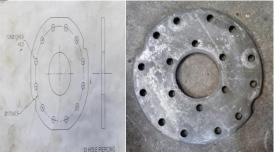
Hole Piercing Design& job Depending on one page report and observation we found the following manufacturing issues in Die,
